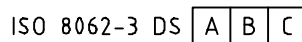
Drawing indication for the datum system for general orientation tolerances in accordance with ISO 8062-3
